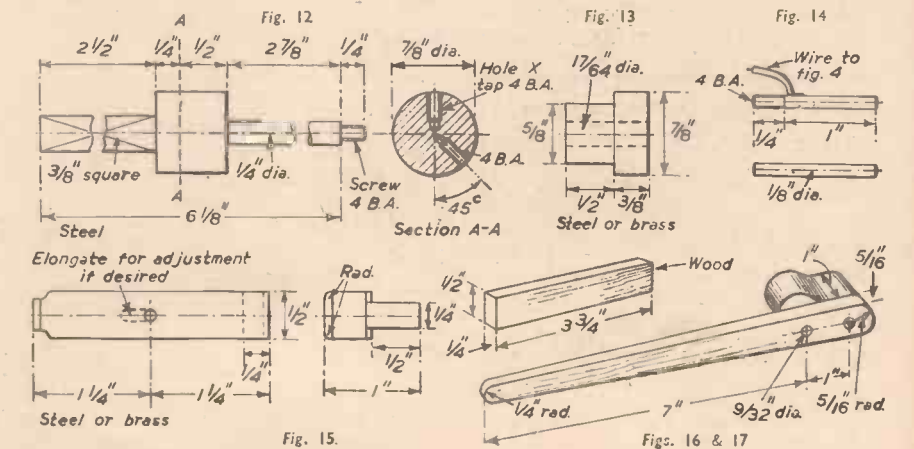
Main spindle. Fig. 13.—Bush. Fig. 14.—Switch legs. Fig. 15.—Switch contact arm. Fig. 16.—Picture stop bar. Fig. 17.—Assembly of handle and cam.
